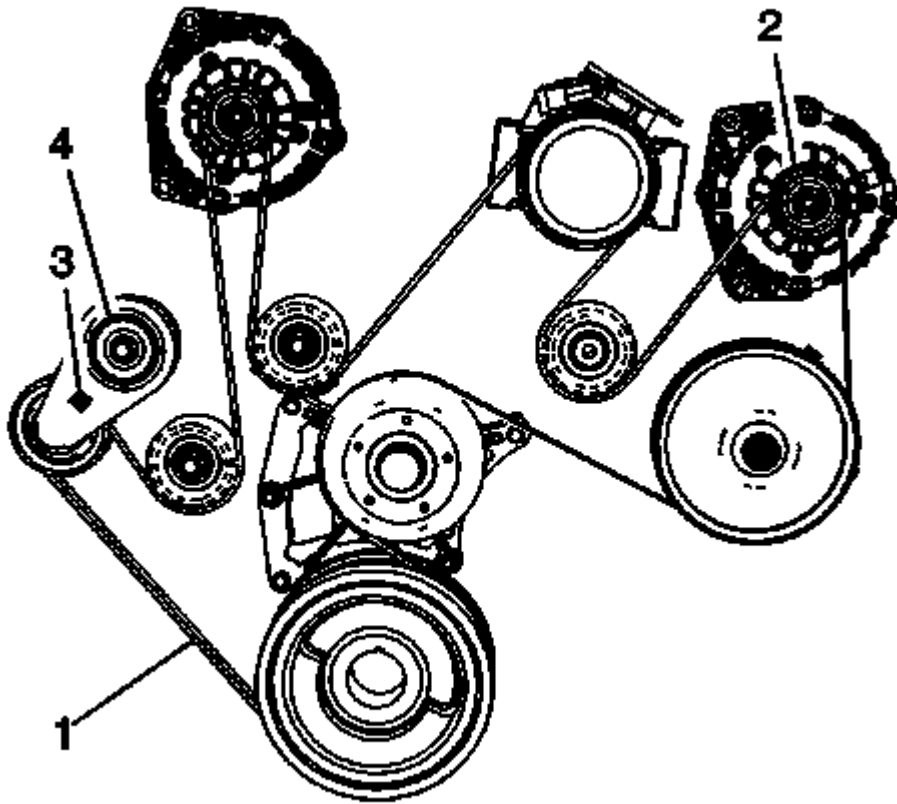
Identifying Drive Belt Routing (With Dual Generators)
